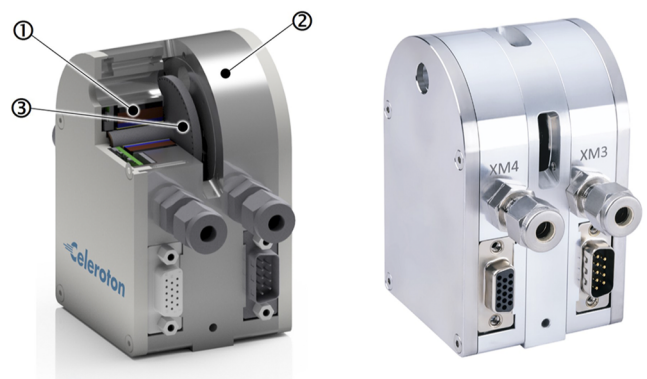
Left: Cutaway view of chopper motor. ①: Heteropolar stator. ②: Homopolar stator. ③: Chopper rotor wheel. Right: Picture of the chopper motor.
